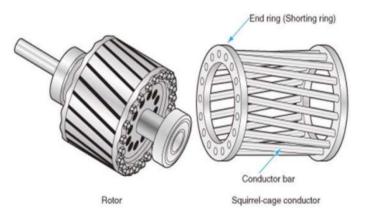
Rotor winding of a squirrel cage machine⁶¹
